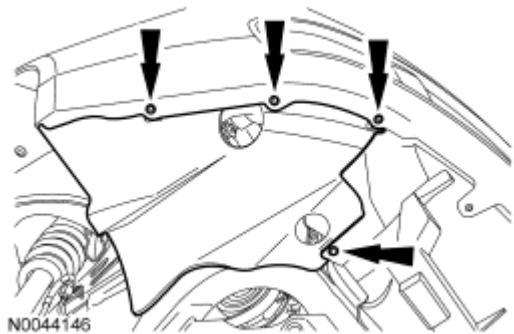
Locating Screws And Position LH And RH Splash Shields Aside
